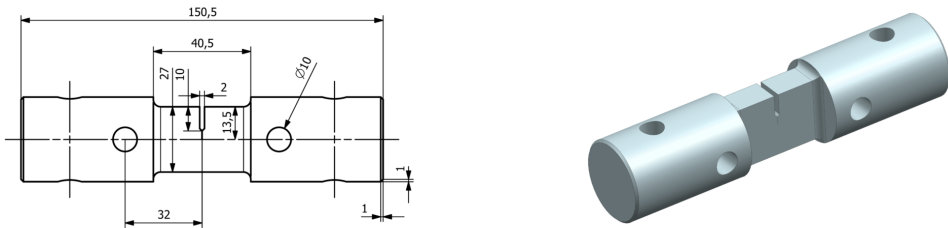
Caption of AFM specimen, CAD model and technical drawing
